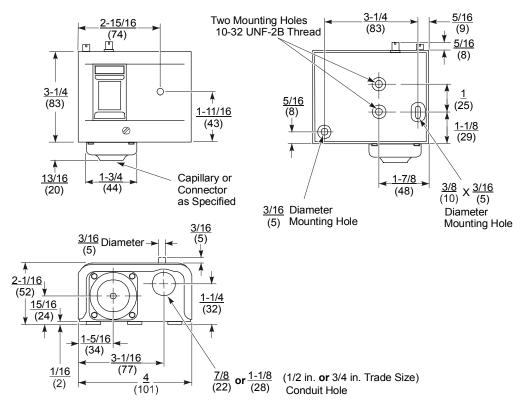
Dimensions for Low Pressure Controls with NEMA 1 Enclosure, in. (mm)
